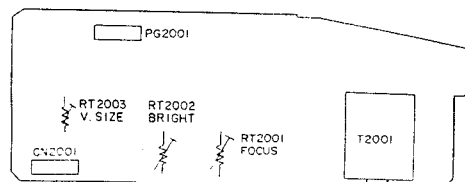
Electrical Adjustment (EVF) Circuit Board (Parts Side)
